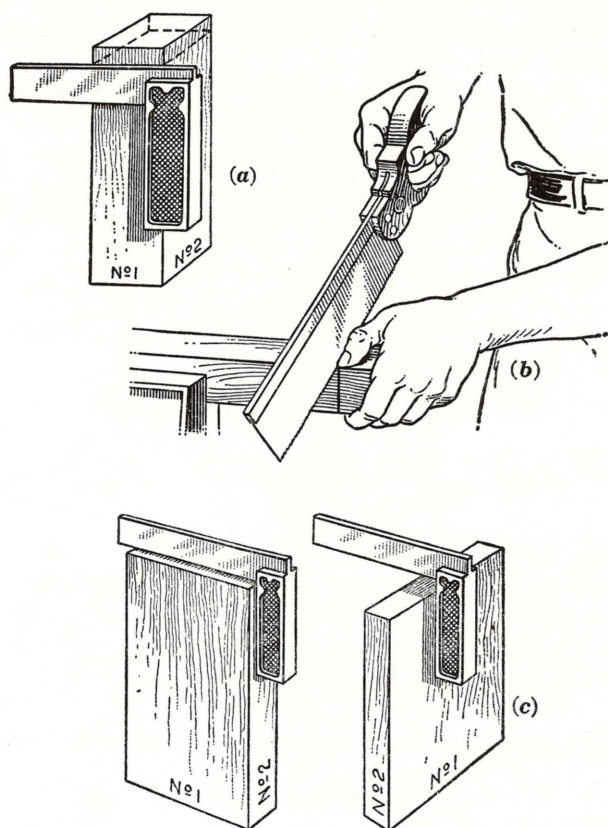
Squaring an end. (a) Drawing the guide line. (b) Sawing with a back saw. (c) Testing for squareness
